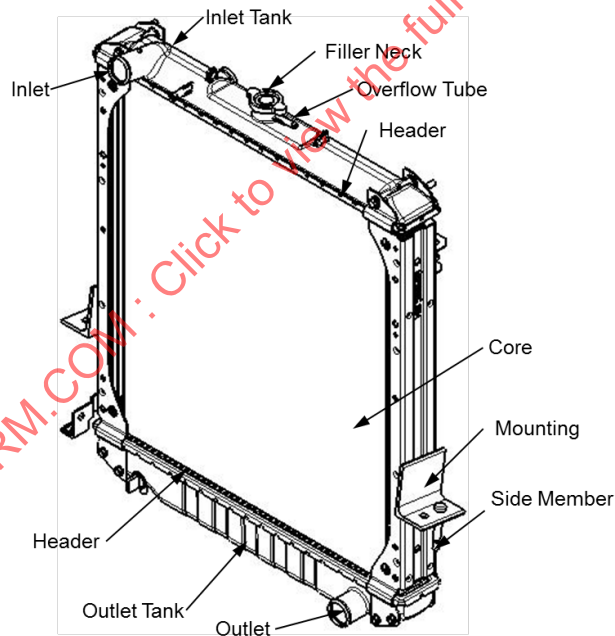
Heavy-duty radiator, sheet metal-type filler frame
